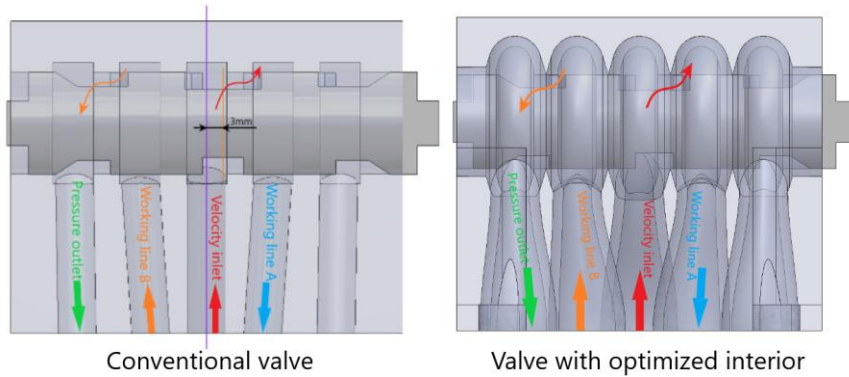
CAD of reference conventionally manufacturable hydraulic valve body and CAD of optimized AM hydraulic valve body with spool.
